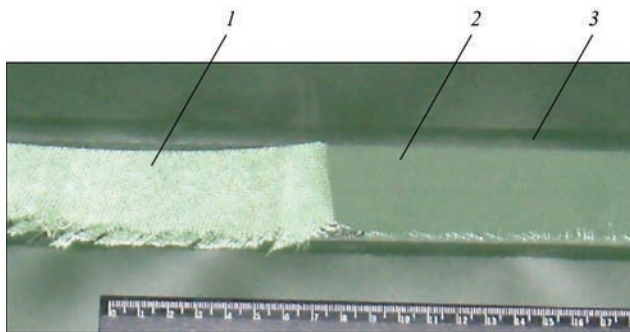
Sound weld of Unisol 950 laminated fabric after testing for tearing off of connecting tape: 1 — torn off tape with exposed cord; 2 — weld; 3 — HAZ near the weld
